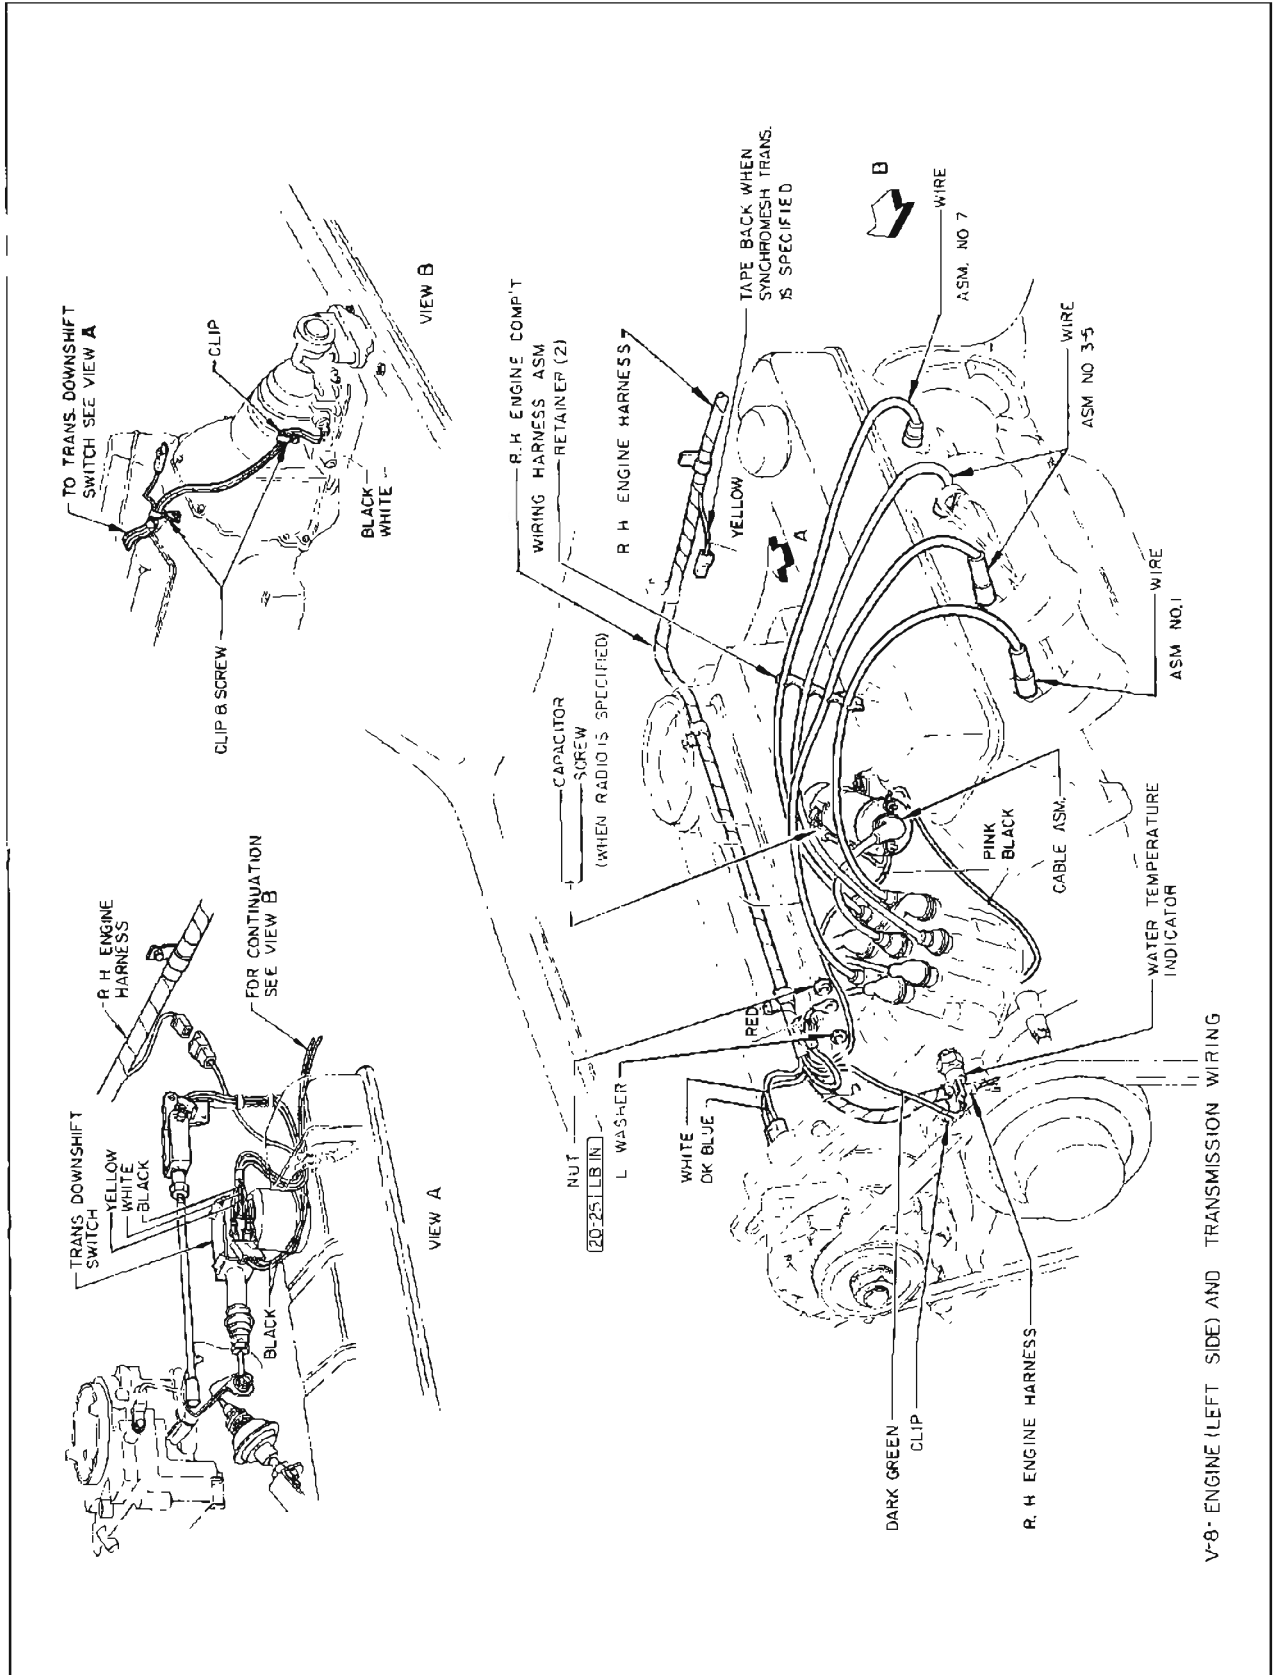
Left Side V-8 Engine and Transmission Wiring
